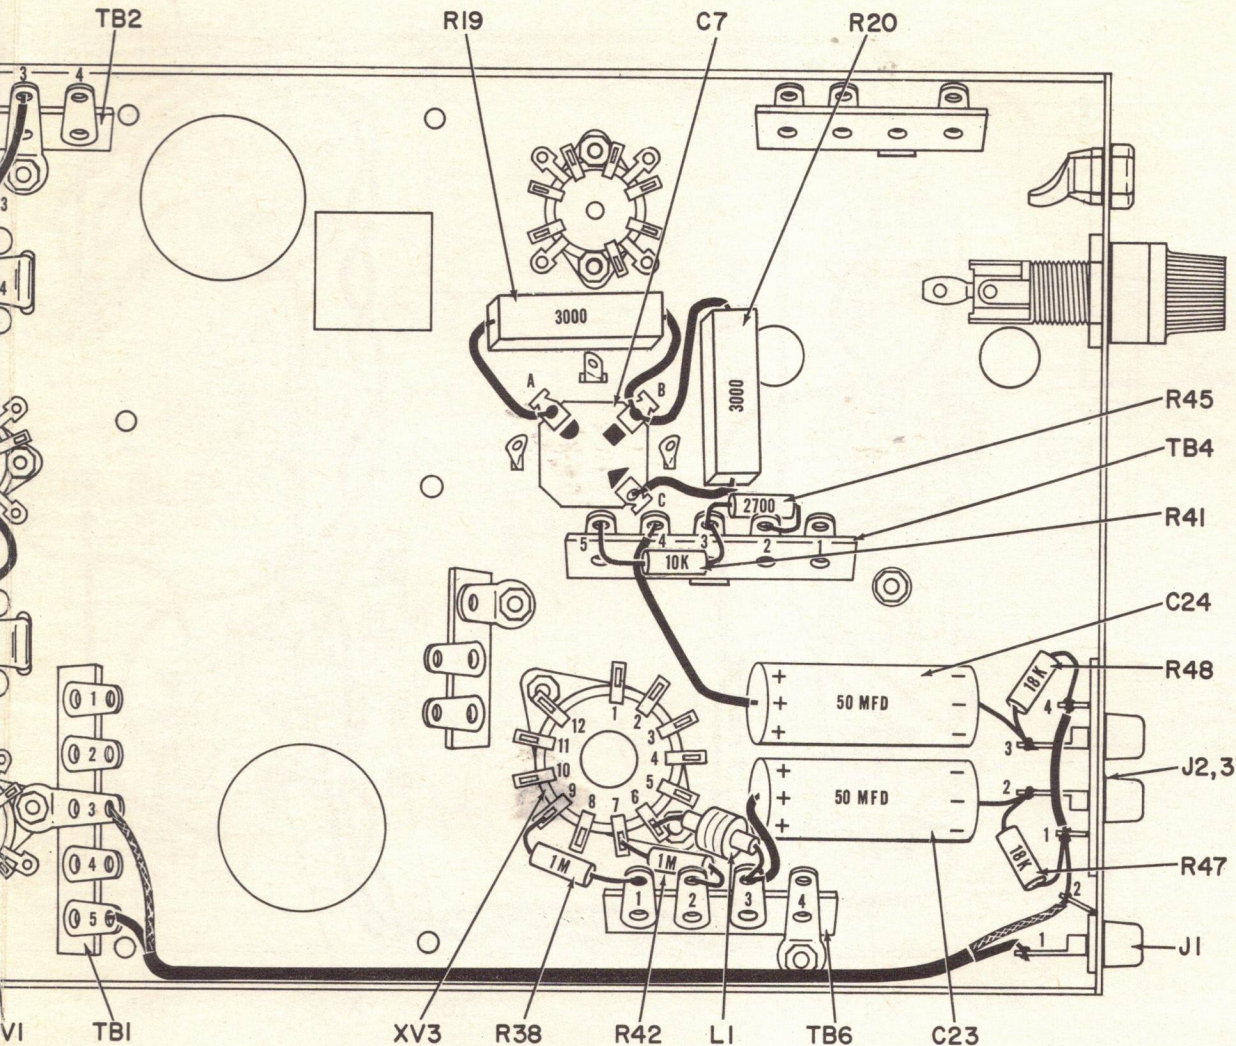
C. Bottom Chassis Wiring (Cont'd.)
